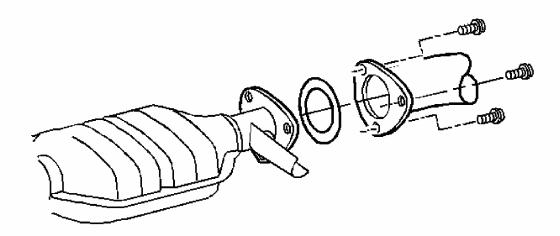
Exploded View Of Intermediate Pipe Bolts Courtesy of GENERAL MOTORS CORP.
